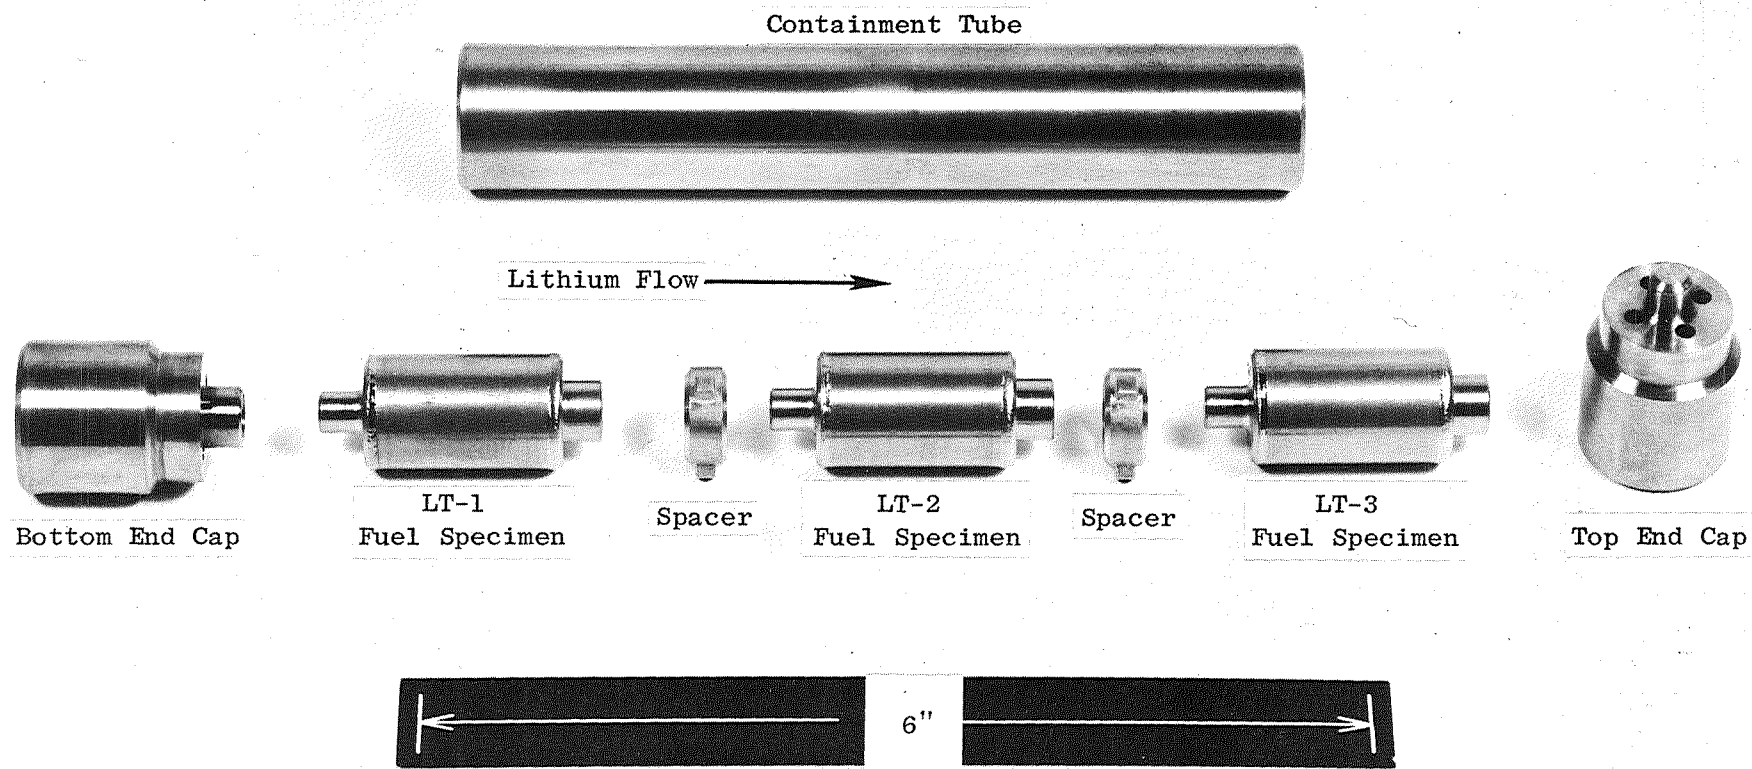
Components of Clad Fuel Element Specimen Capsule Subassembly - 1900°F Lithium Loop. Containment Tube, Caps and Specimen Clad: T-111. Spacers: Mo-TZM.
